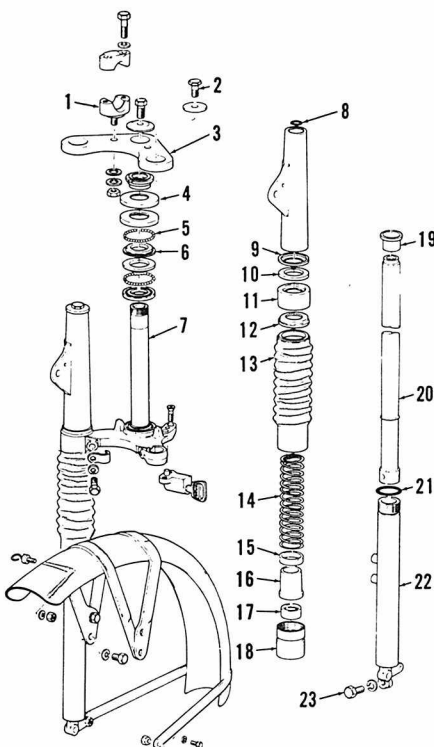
Exploded view of front suspension units typical of G5 and G6 models.
